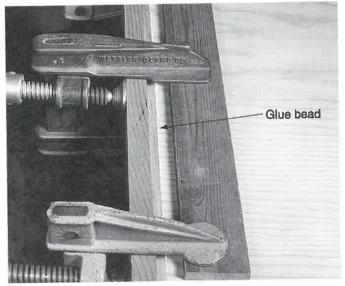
A properly clamped glue joint should have glue beads, but not runs. The absence of beads may indicate a *starved joint*.
